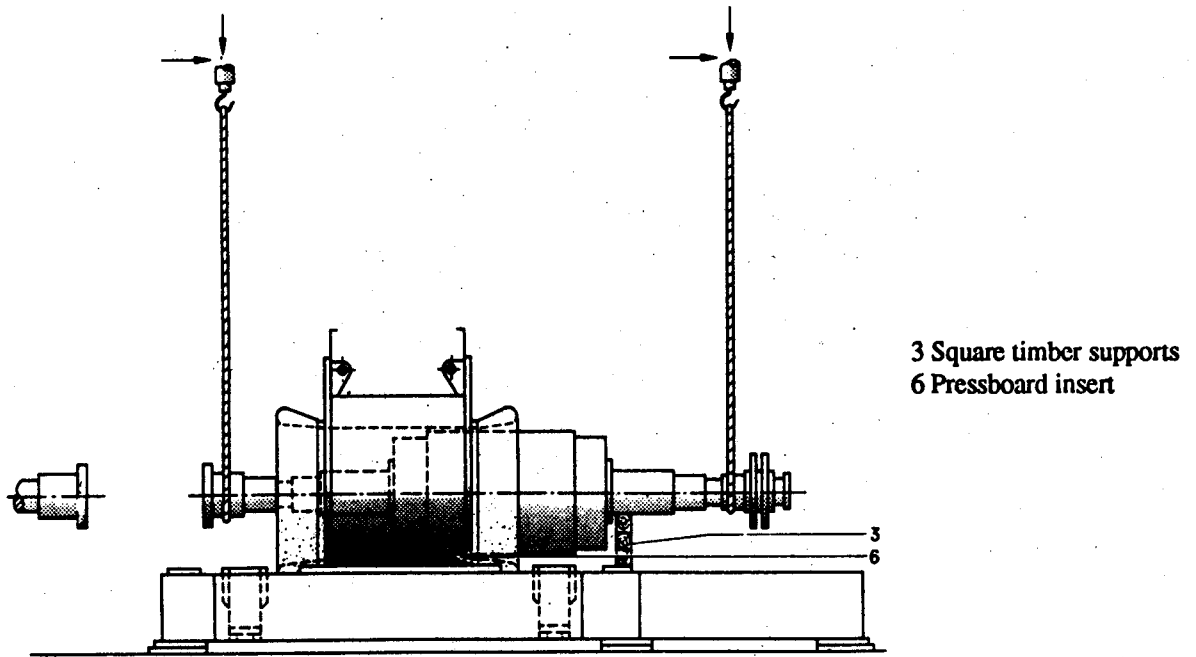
Withdrawing the rotor and setting it down in the stator core and assembly support for attaching the dummy shaft
